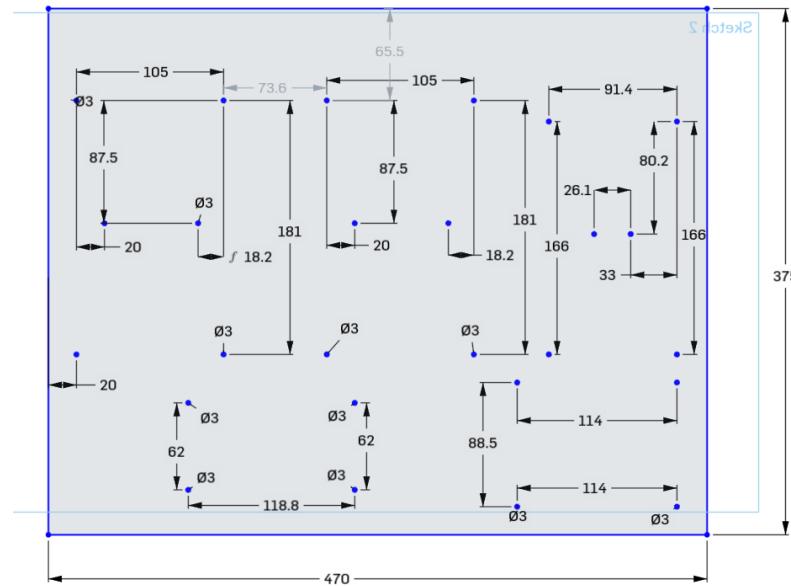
Bottom panel CAD drawing (Units are in mm)
